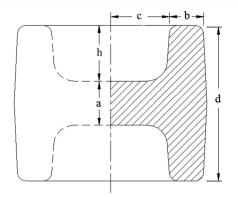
Shape and parametric dimensions of axisymmetric H-shaped part
